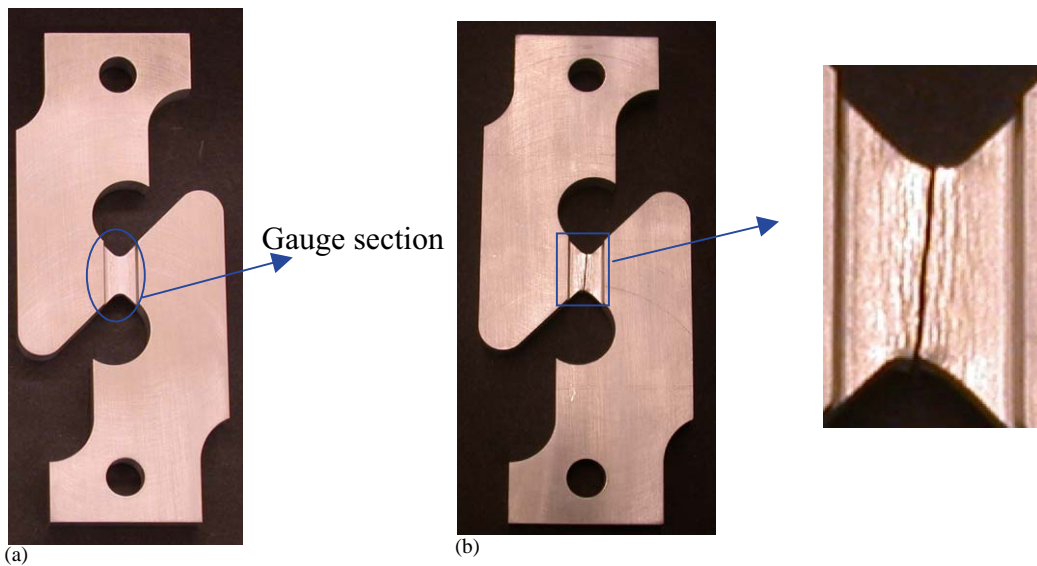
A new specimen configuration of pure shear tests: (a) undeformed specimen and (b) fractured specimen.
